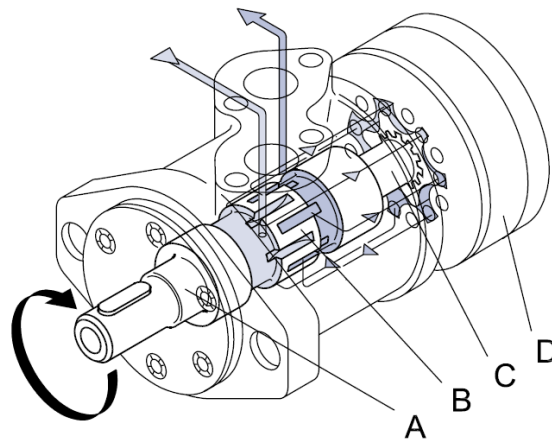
Internal View of OMR Orbital Motor where: A=Output Shaft, B=Spool (Distributor) Valve, C=Cardan Shaft, D=Gear-Wheel Set (Danfoss, 2015).
